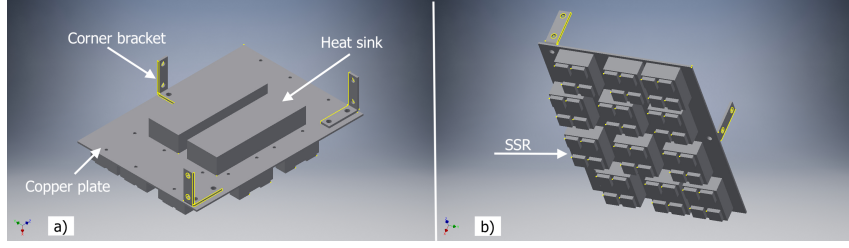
Detailed view of the Middle plate seen in 4 fig. b) part. The combined structure contains: 3 L-brackets, 2 heat sinks, a copper made main plate, 10 SSRs. a) view from the top; b) view from the bottom to show SSRs arrangement.
